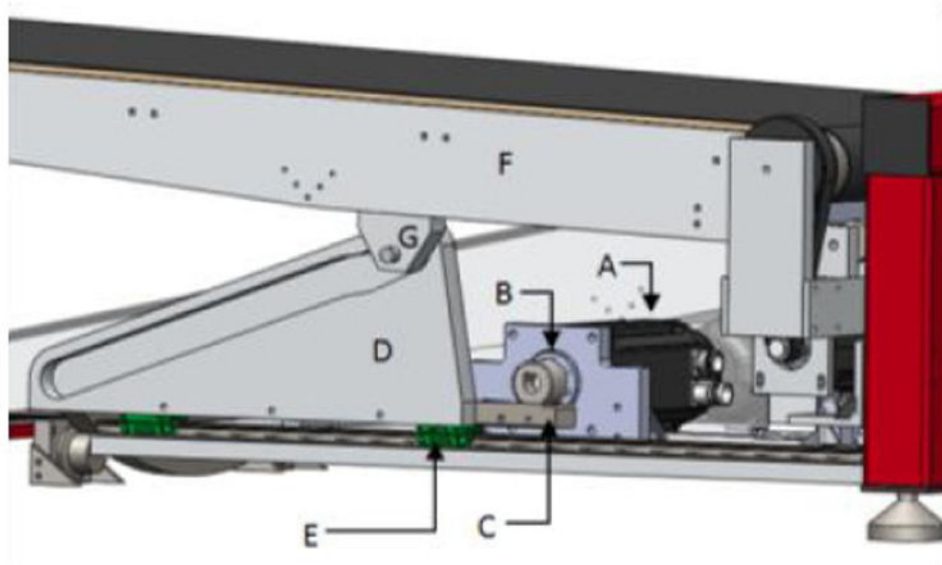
Sagittal Plane actuator and transmission. A. Brushless servo motor. B. Pinion gear. C. Rack Gear. D. Linear Cam. E. Linear Bearing. F. Treadmill Track. G. Cam follower mount.
